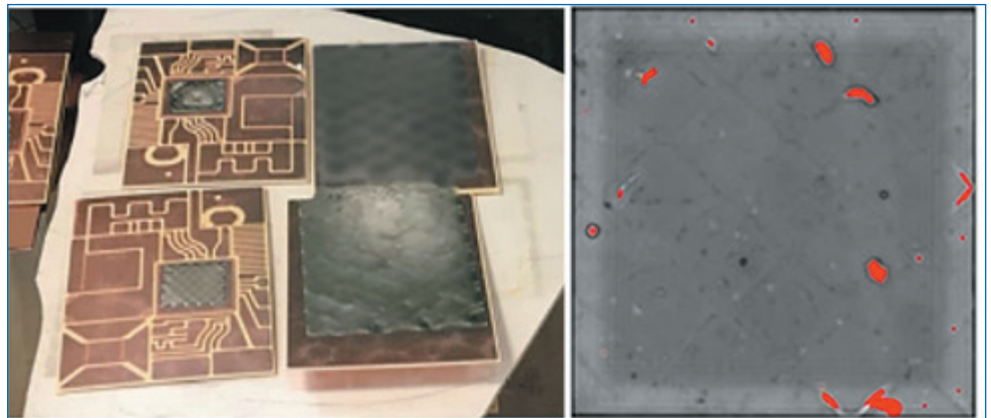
Soldering results showed good wetting (left) and voiding (right) of 1.0%.
